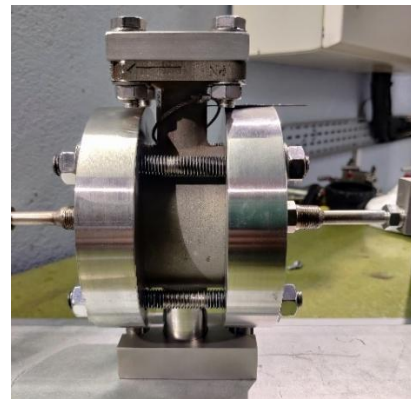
VALVE BODY CLAMPED BETWEEN FLANGES – BURST TEST
